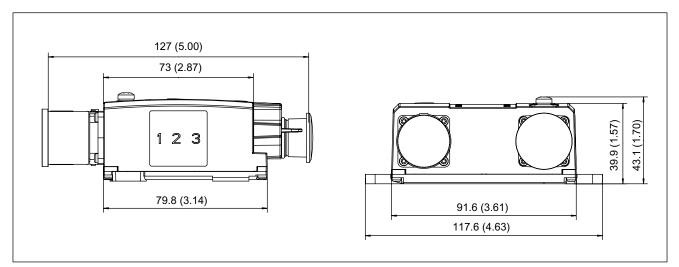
Dimension drawing SME120, Order number 6SL3055-0AA00-5JA3
